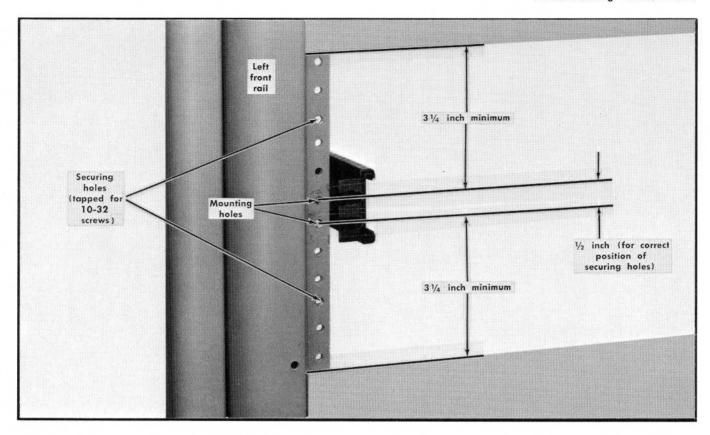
Locating the mounting holes for the left stationary section. Same dimensions apply to right stationary section.
